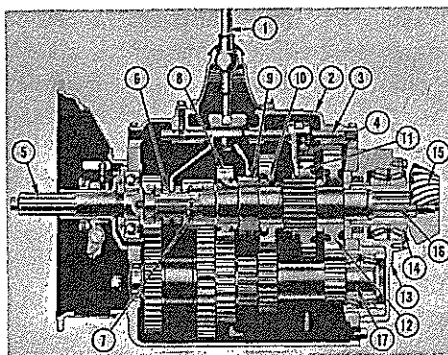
TRANSMISSION AND ADAPTOR (FULLER 5G-720)
